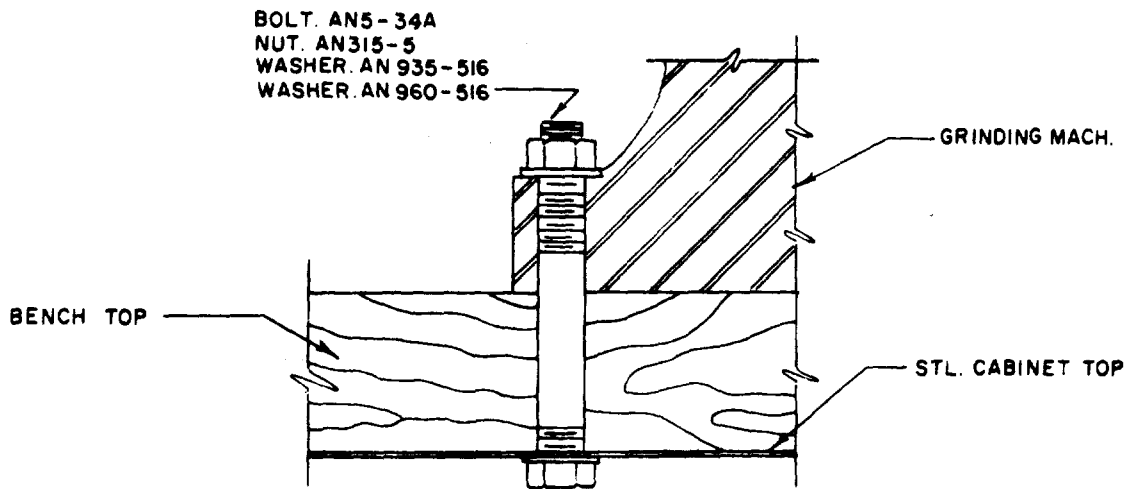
Typical Bench Mounting, Utility Grinding Machine.
